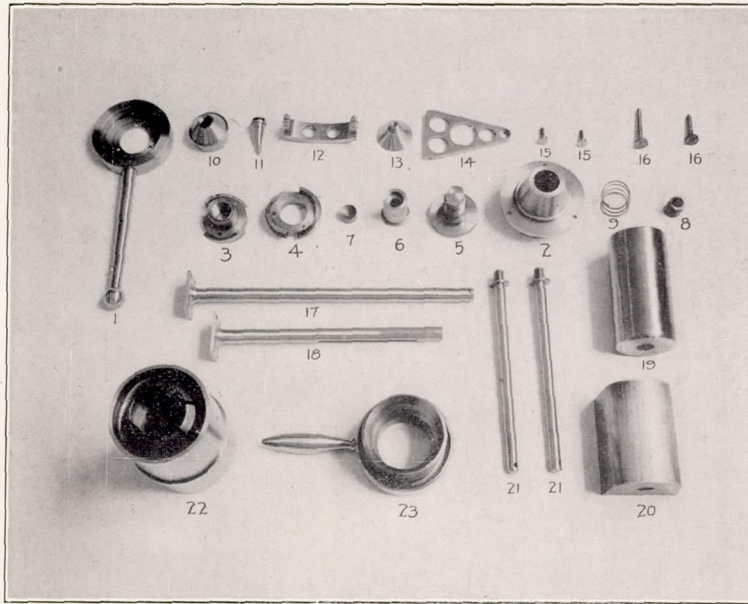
1 TO 11, LOWER PIVOT AND LOWER PIVOT SOCKET PARTS; 12, V. F. LINK FRAME; 13, V. F. ROD SOCKET; 14, V. F. LINK; 17, 18, COUNTERWEIGHT ARMS; 19, 20, COUNTERWEIGHTS; 21, SENSITIVITY WEIGHT SPINDLES; 22, 23, BRAKE PARTS.
